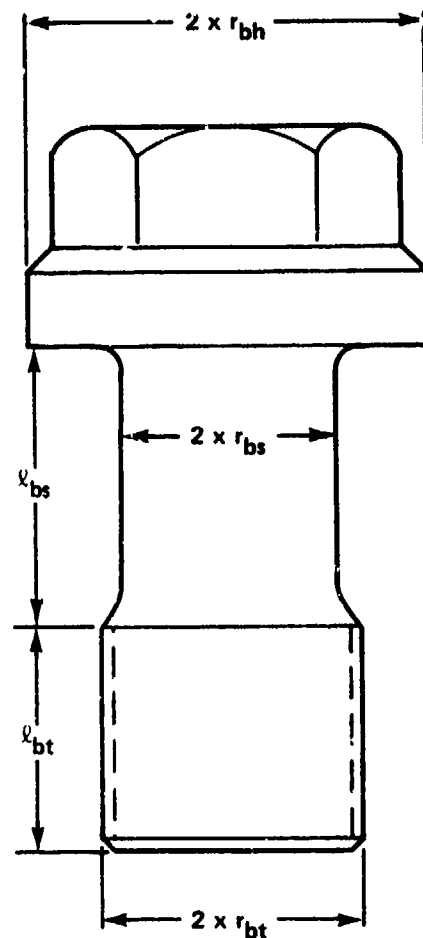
Dimensions Used in Table 2 for Blade Bolts
